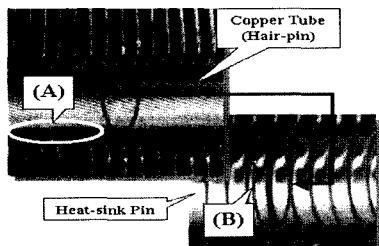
Section of Heat Exchanger(after Tube Expanding)
